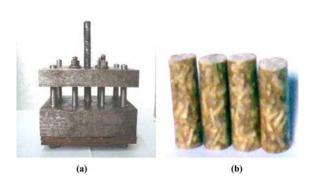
(a) Mould used for preparing samples and (b) fabricated composite pins
